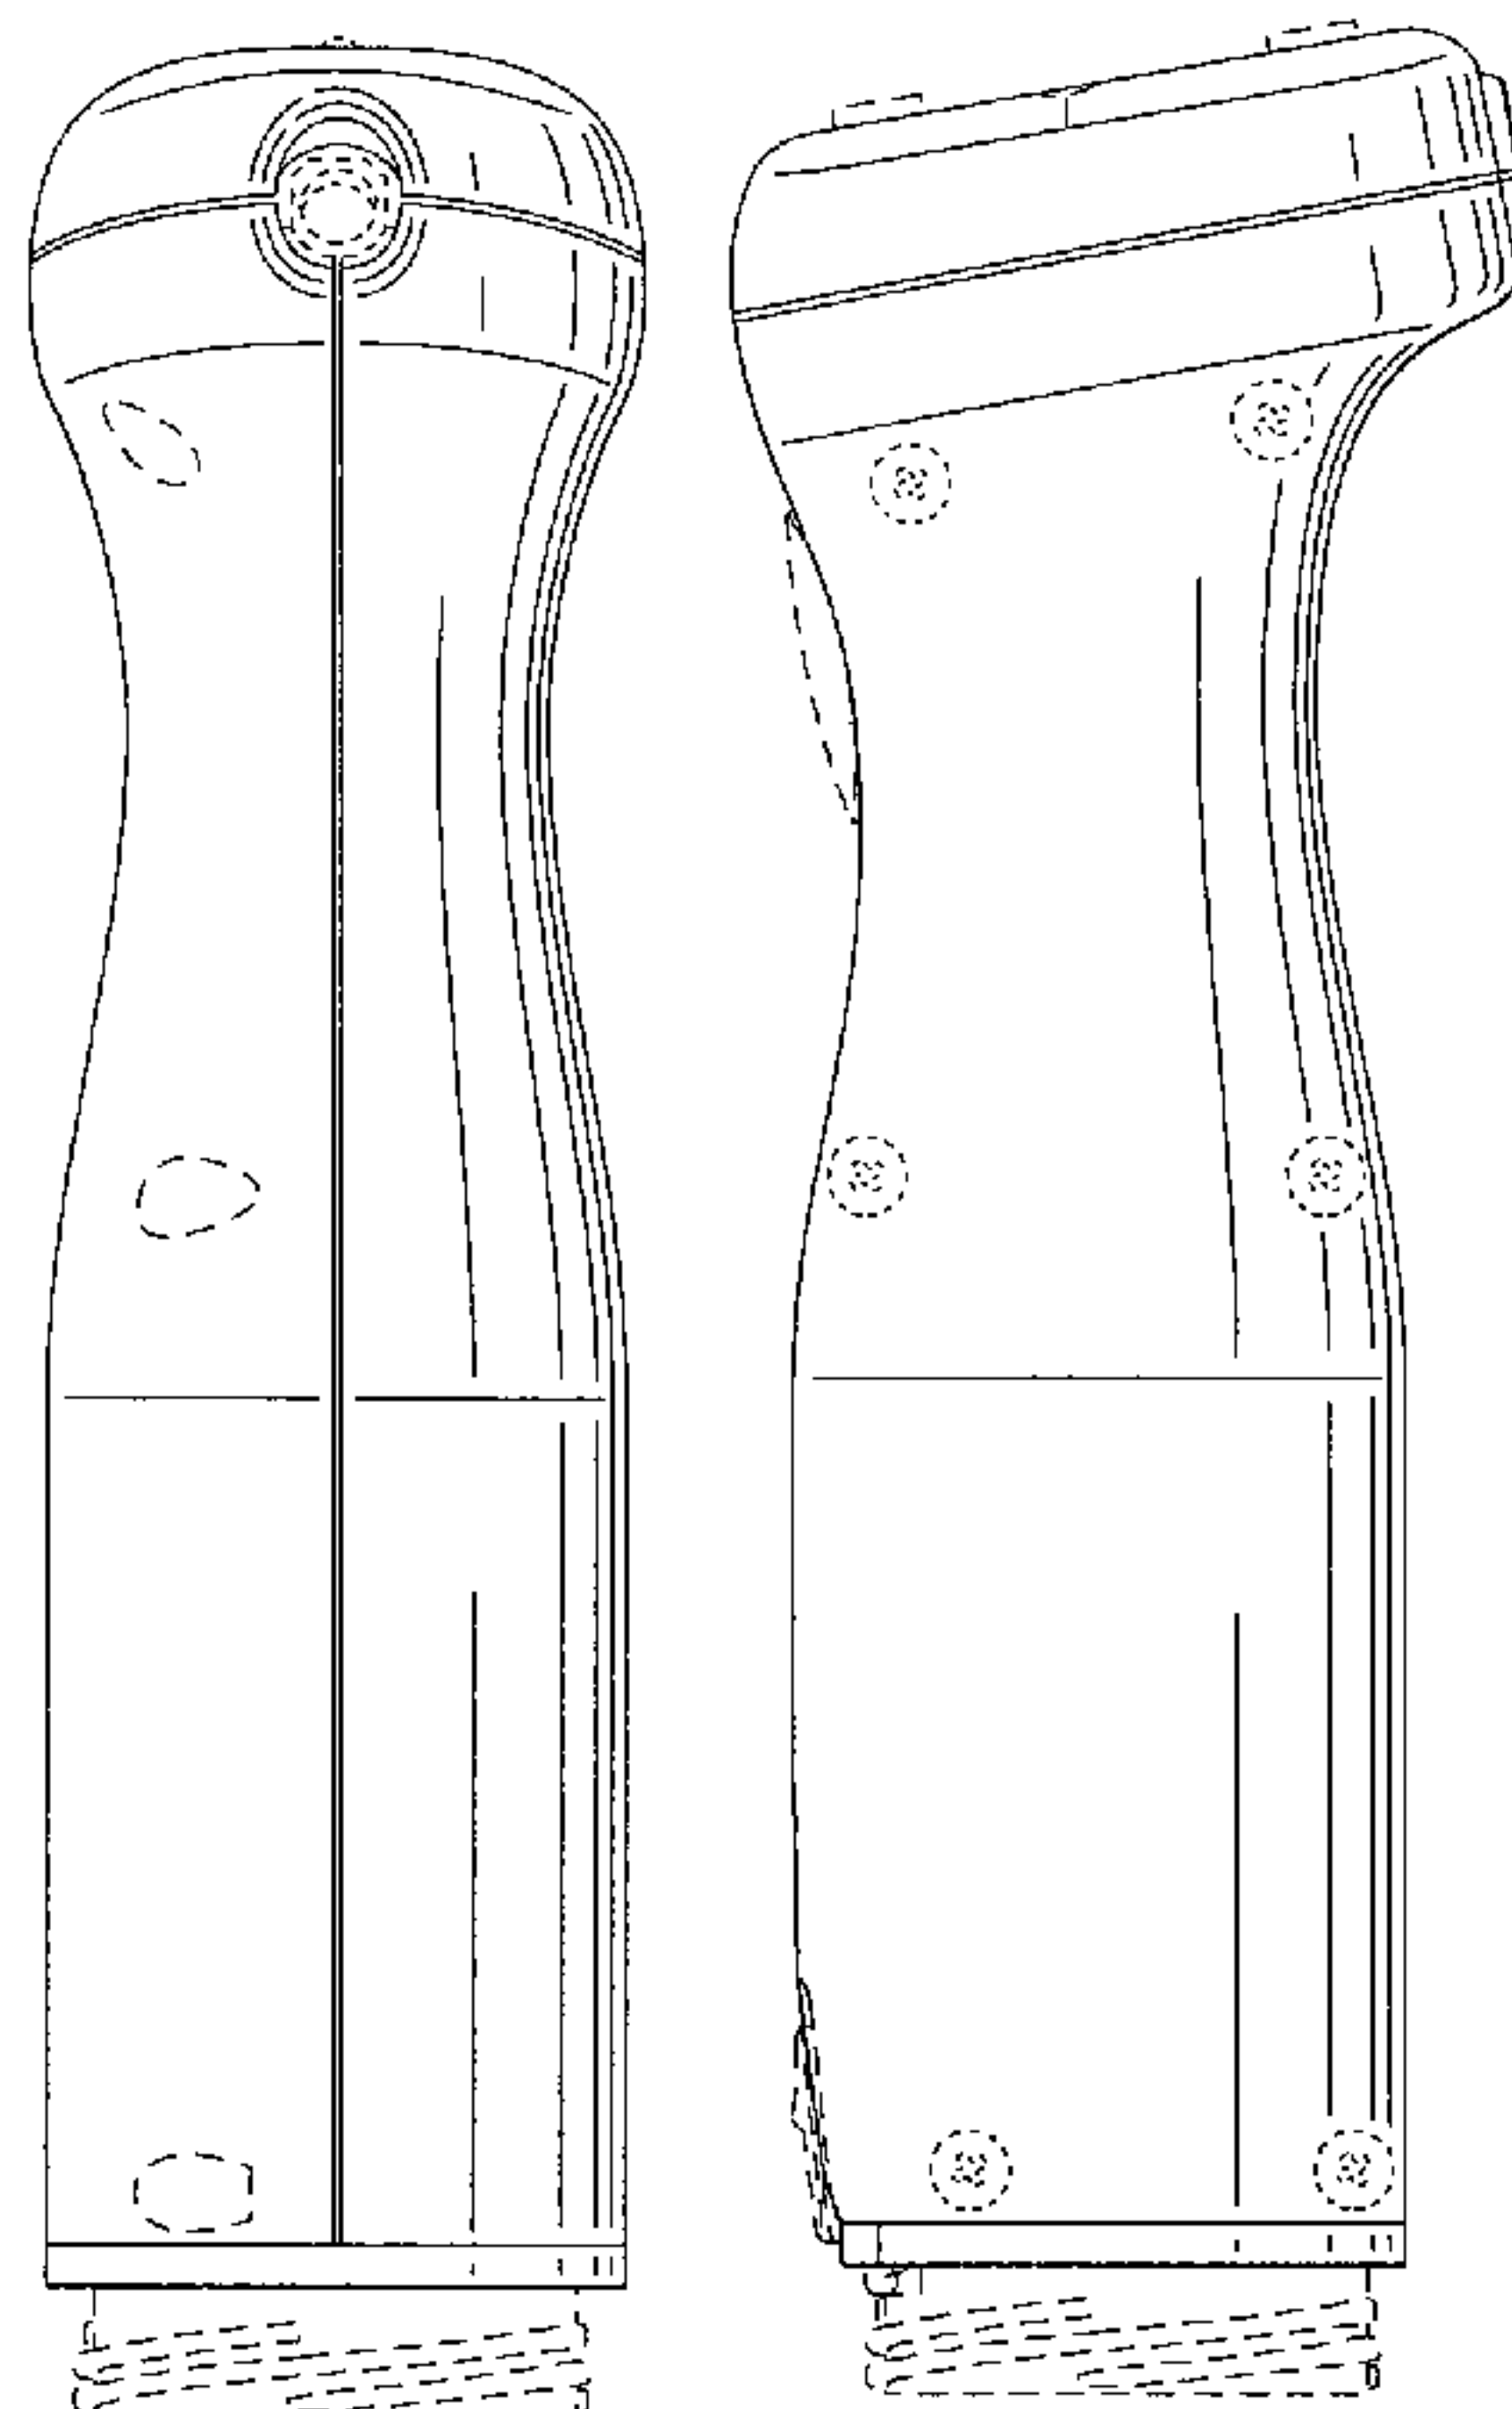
is a right side view of the handle for electric crimper or decapper shown in FIG. 1;
